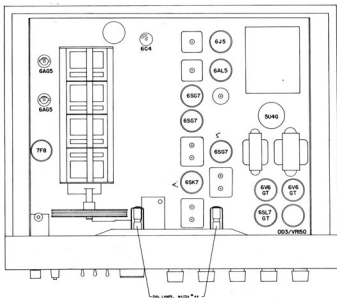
Top View Showing Location of Tubes and Dial Lamps
